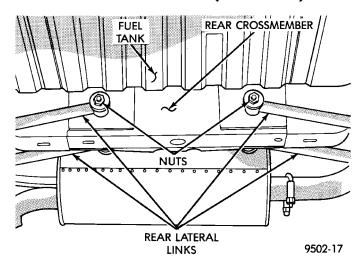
Rear Lateral Link To Crossmember Attaching Bolts
